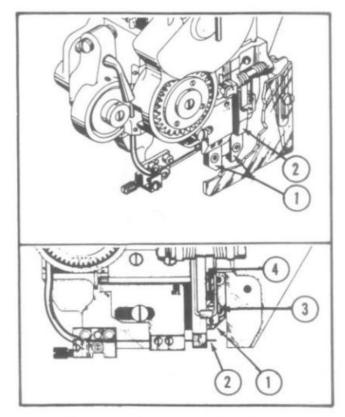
Adjustments for Aligning Gripper Bar and Formers
